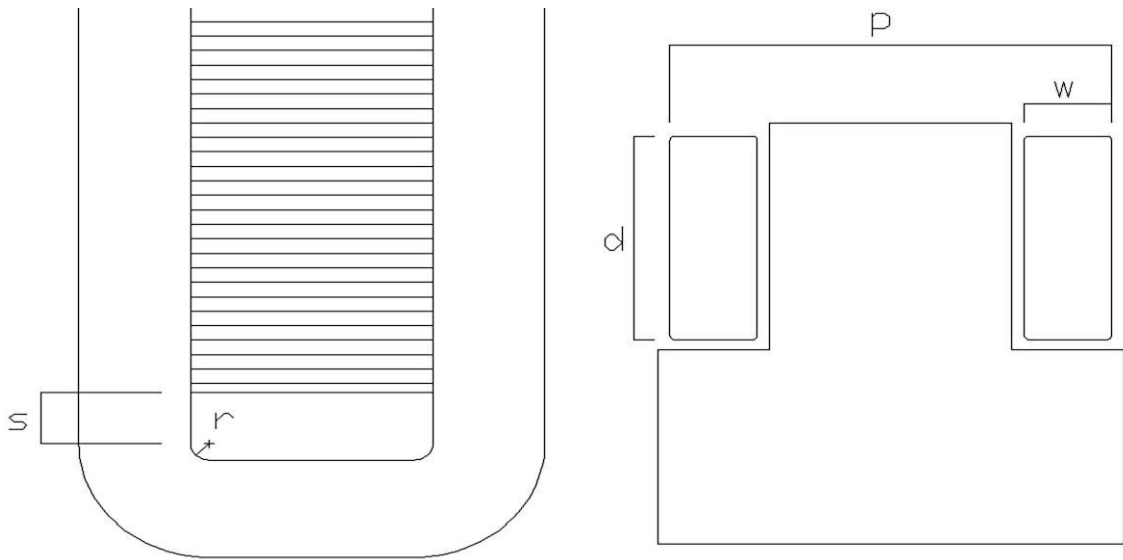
Relevant coil dimensions for determining end turn inductance of a concentrated coil machine
